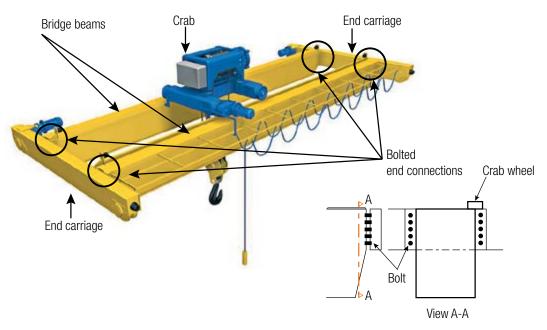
Typical layout of a double bridge crane, with schematic sections showing a bolted end connection (adapted from image at www.podemcrane.com/?p=15&l=2&id=3)
